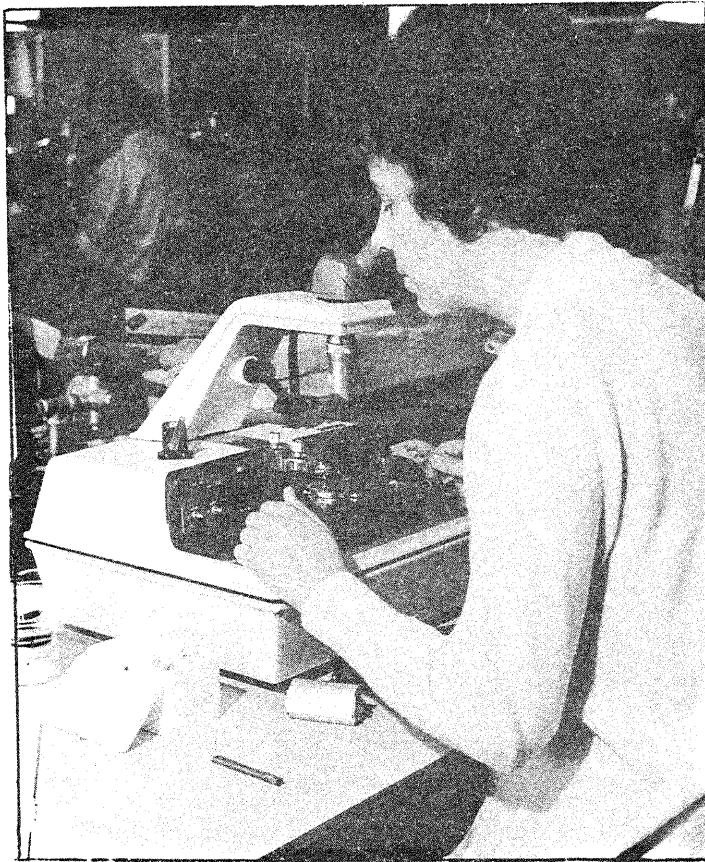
THE "TEMPRESS" SCRIBING MACHINE
